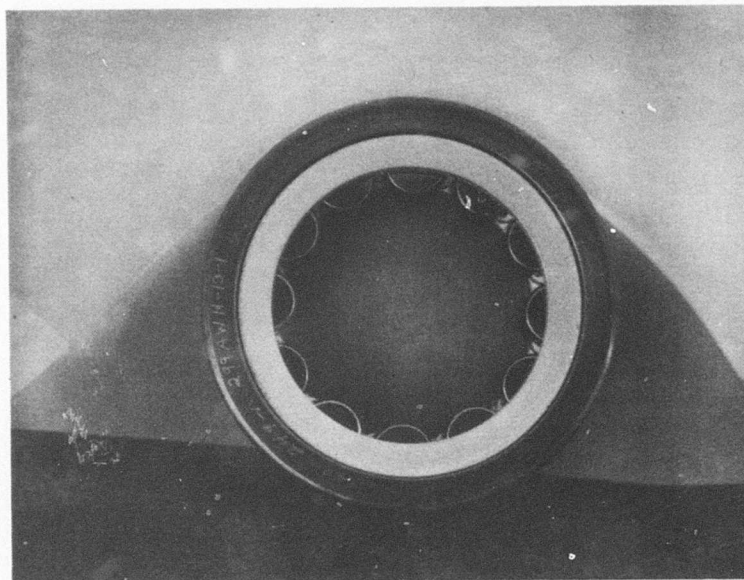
Input pinion roller bearing with silver-plated steel retainer.
